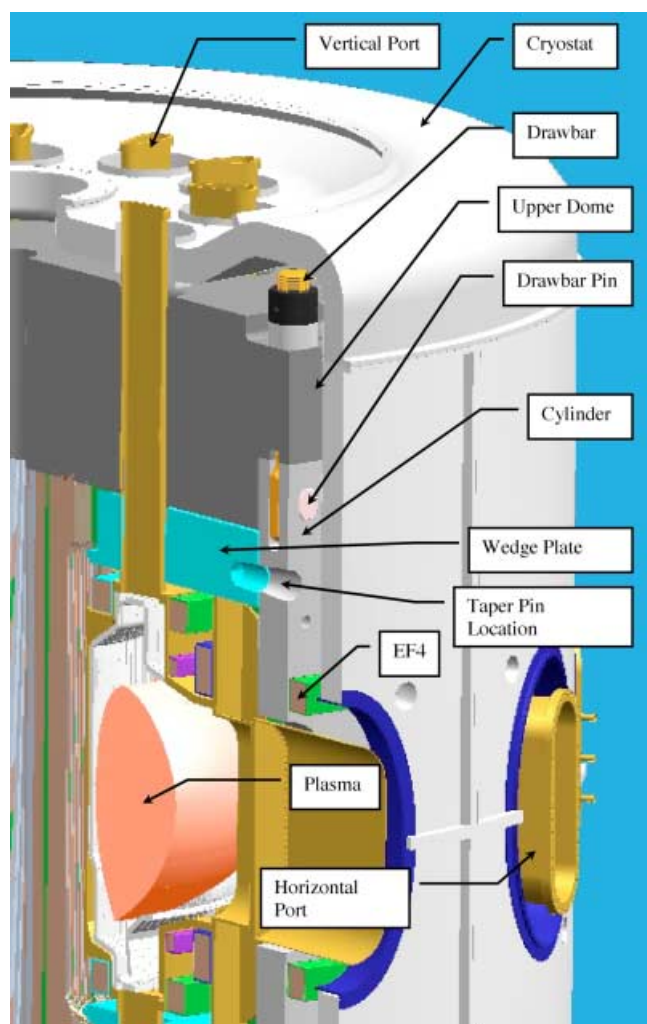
Cutaway view showing EF4 magnet, cylinder, domes, drawbars, and cryostat.
